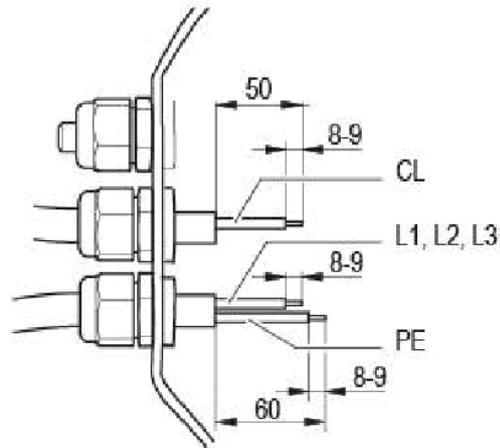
Recommended stripping lengths in mm (inside terminal box)
